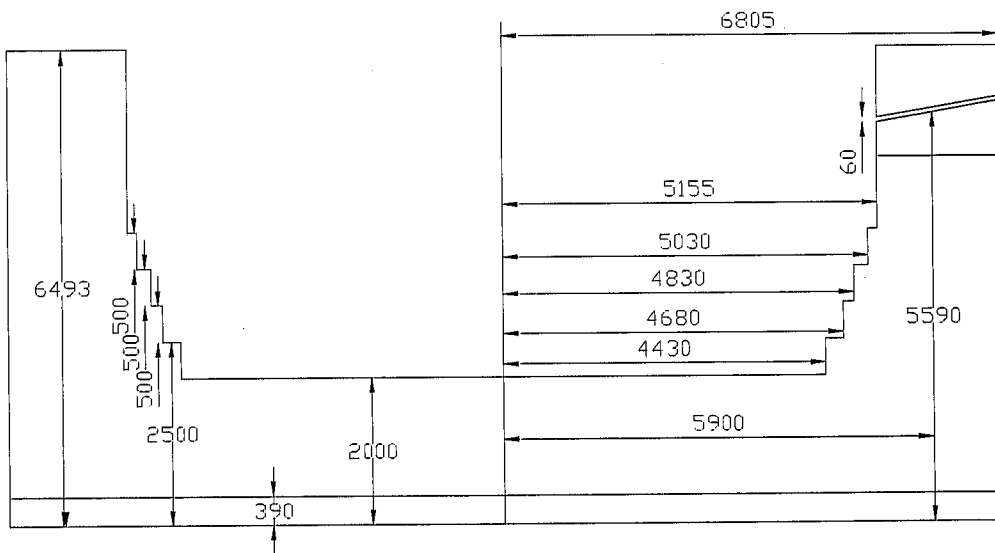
Dimensions (mm) of PK6 Blast Furnace
